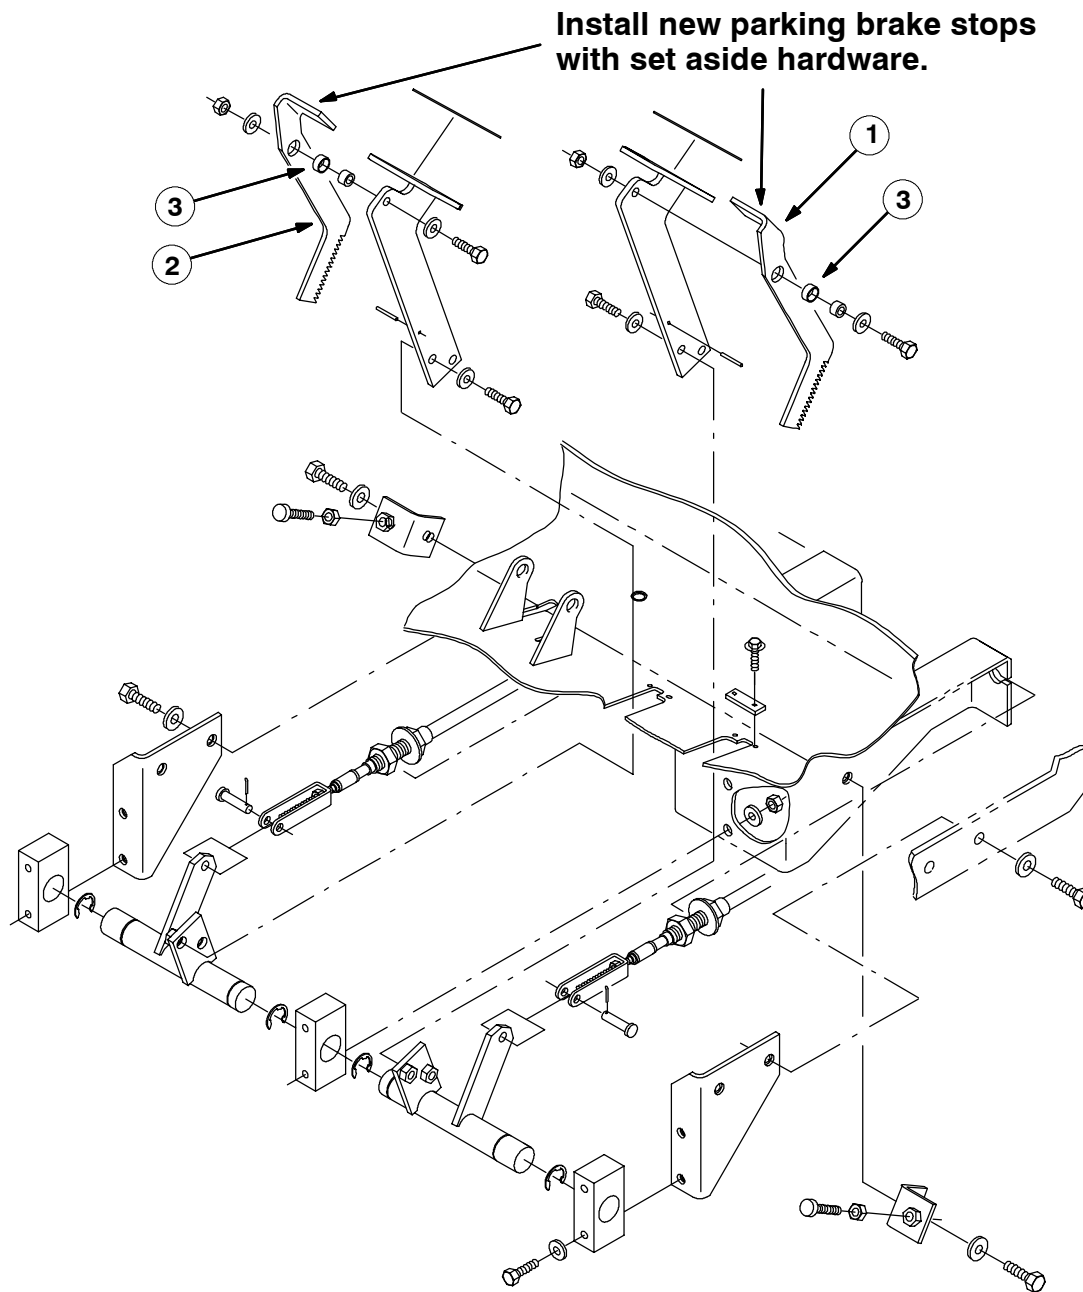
NEW PARKING BRAKE STOP ASSEMBLY
